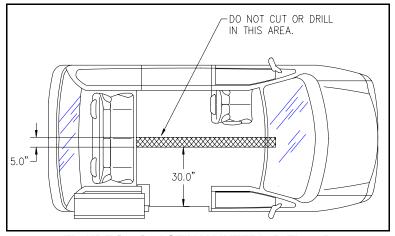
ACTIVAN INTERIOR FLOOR
